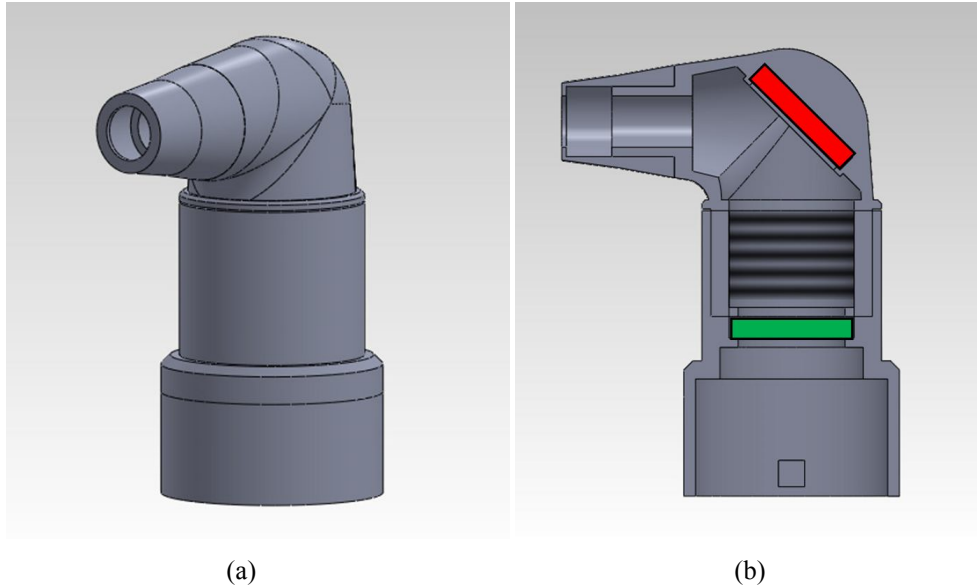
(a) The construction drawing of the new probe of L shape; (b) a cross section of the new probe of L shape.
